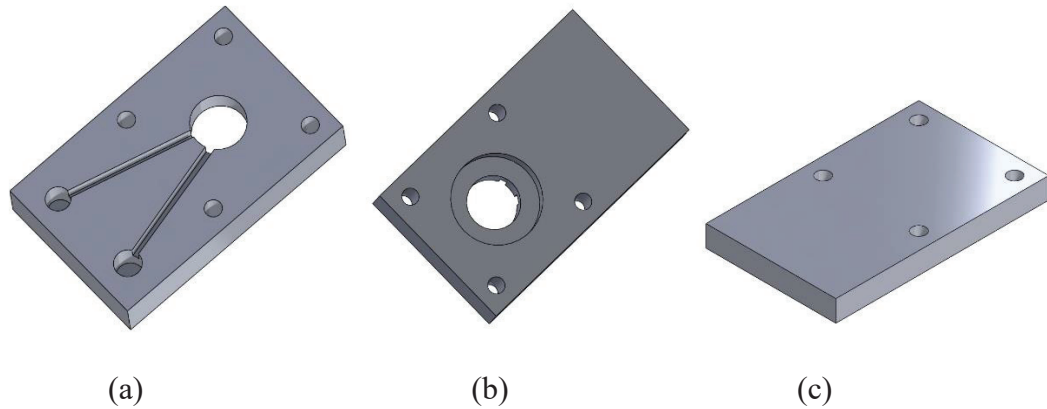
Stage parts (a) Top view of top part (b) Bottom view of top part (c) Middle part
